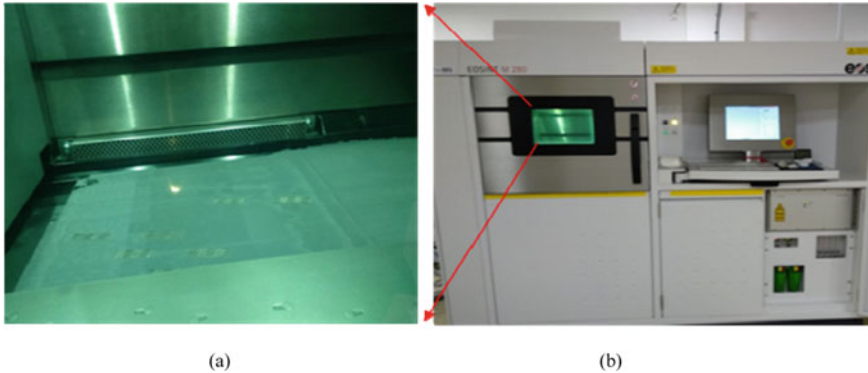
a DMLS machine build chamber and b DMLS machine used
